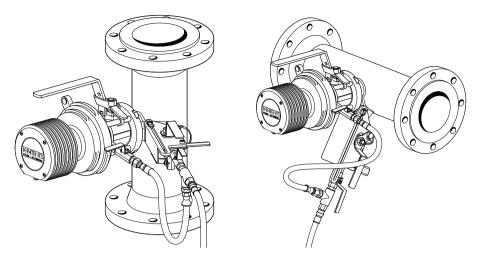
Vertical and horizontal spool piece assemblies (steam wash system)
